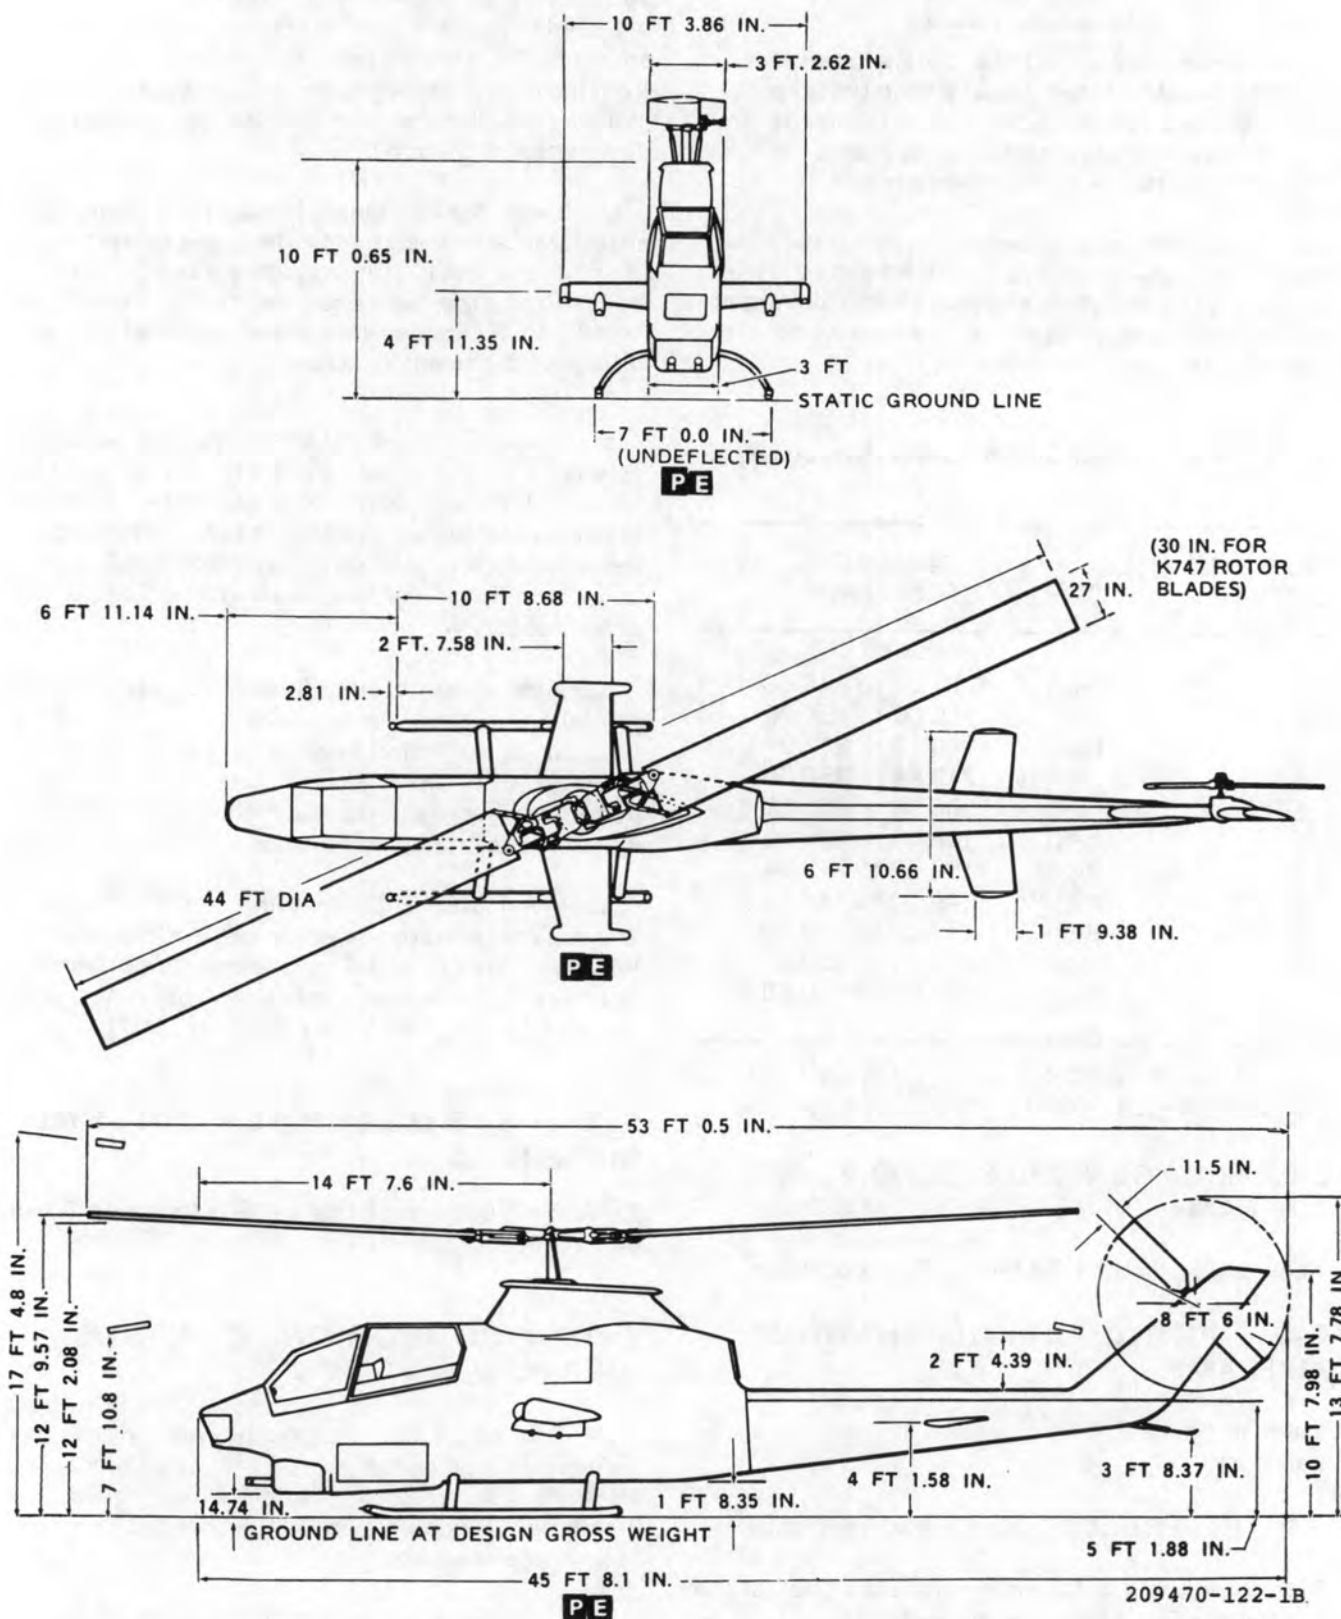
Principal Dimensions — Airframe (Sheet 1 of 2)
